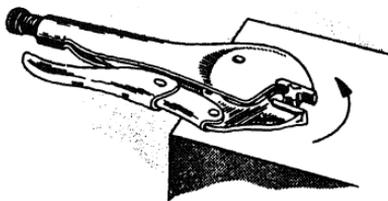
Removing a broken bolt and retapping the hole to a larger size.
